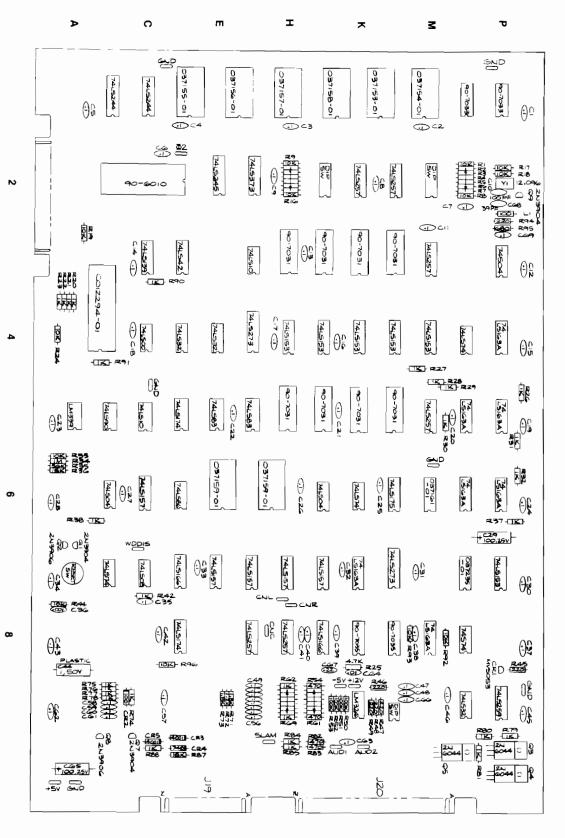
Warlords[™] Game PCB Assembly A036434-01 and -02 B
